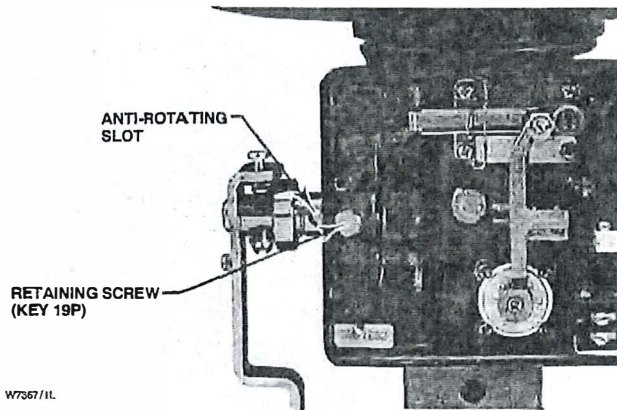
Installing the Feedback Lever Assembly (Key19) on the Positioner
